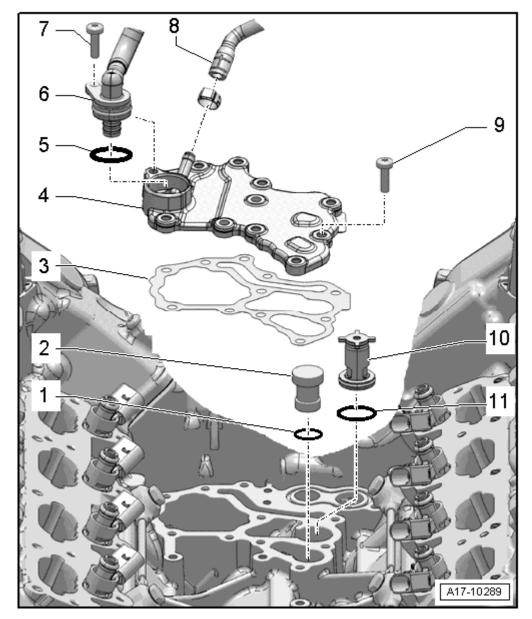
Identifying Oil Check Valve And Spray Nozzle Valve Overview Courtesy of AUDI OF AMERICA, LLC
